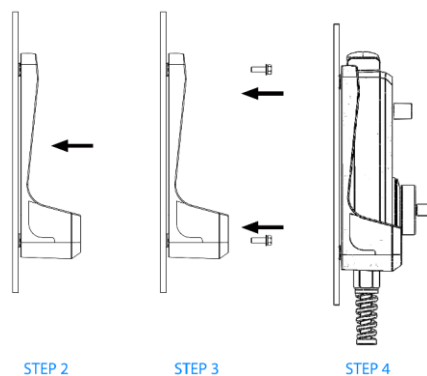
Mechanical Mounting of Remote Pendant Cradle
